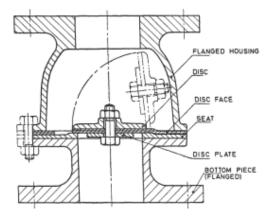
B Typical Sectional Drawing of Flanged Reflux Valve To Be Used In Suction Line of Agricultural Pump
